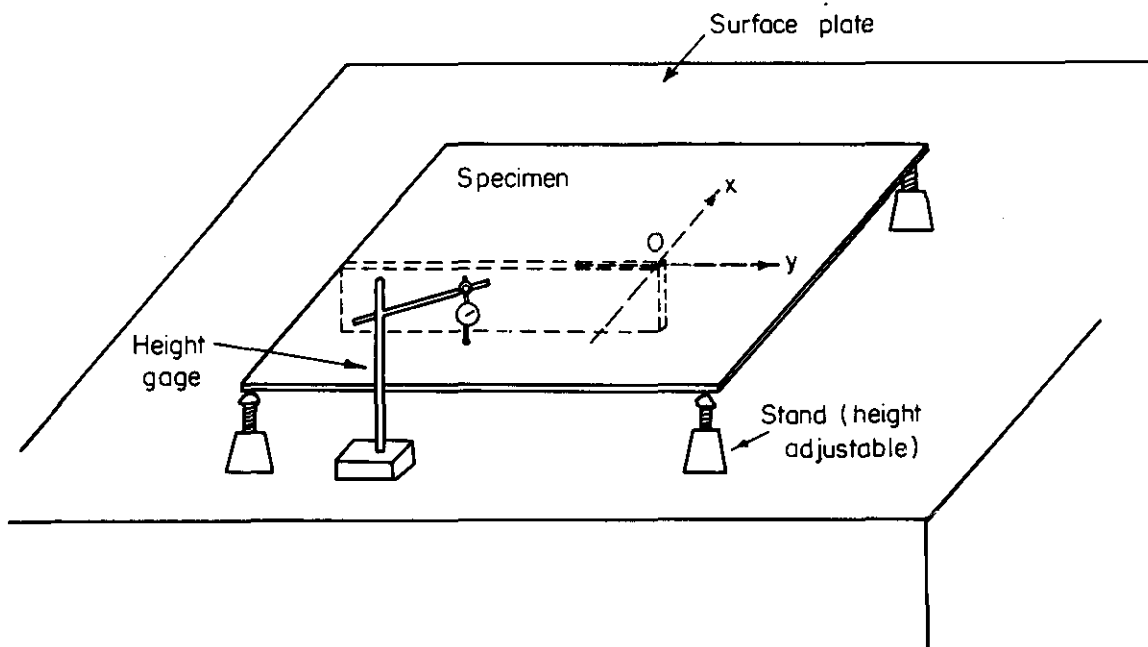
Method of measuring distortion of complex welded structure.
